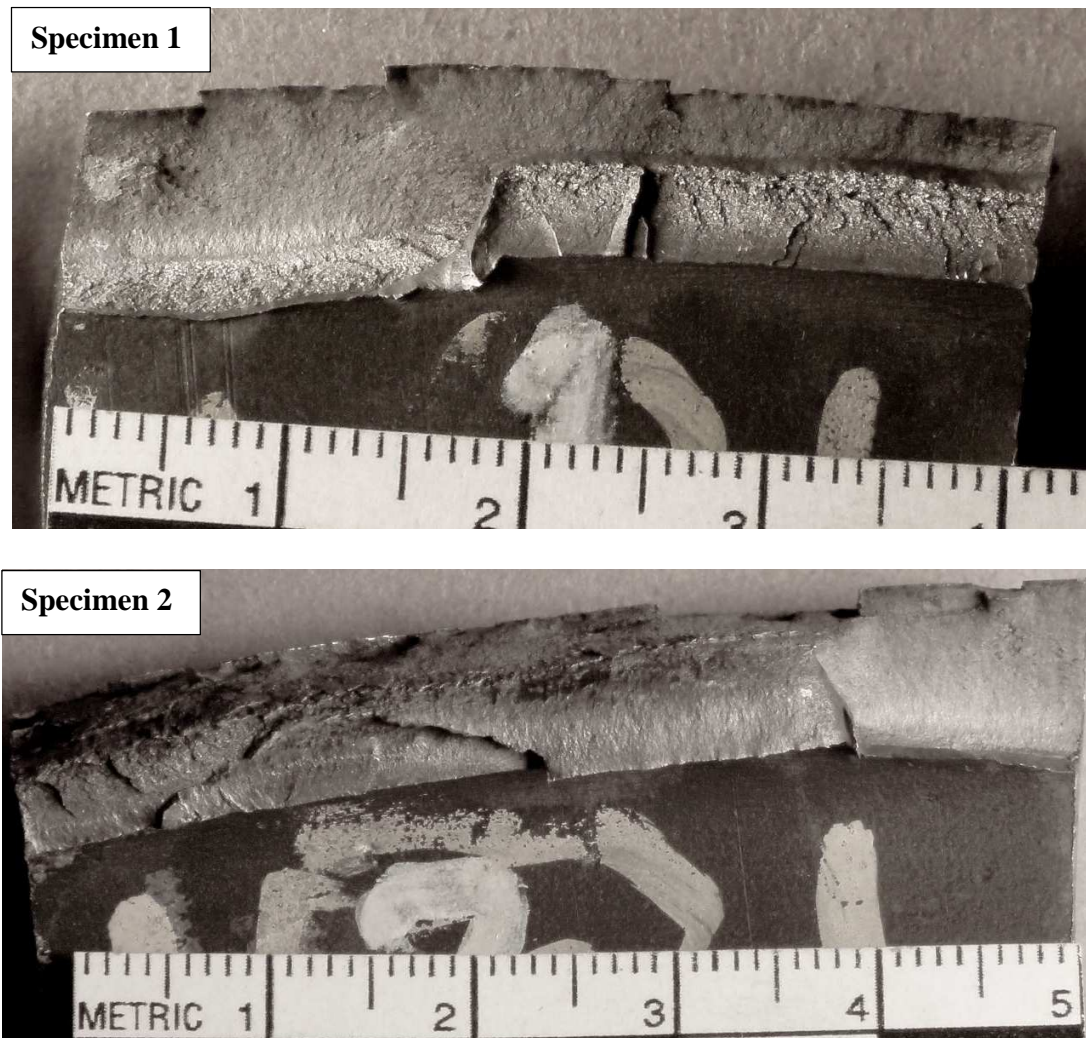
SECONDARY INTERNAL CRACKING ADJACENT TO FRACTURE
